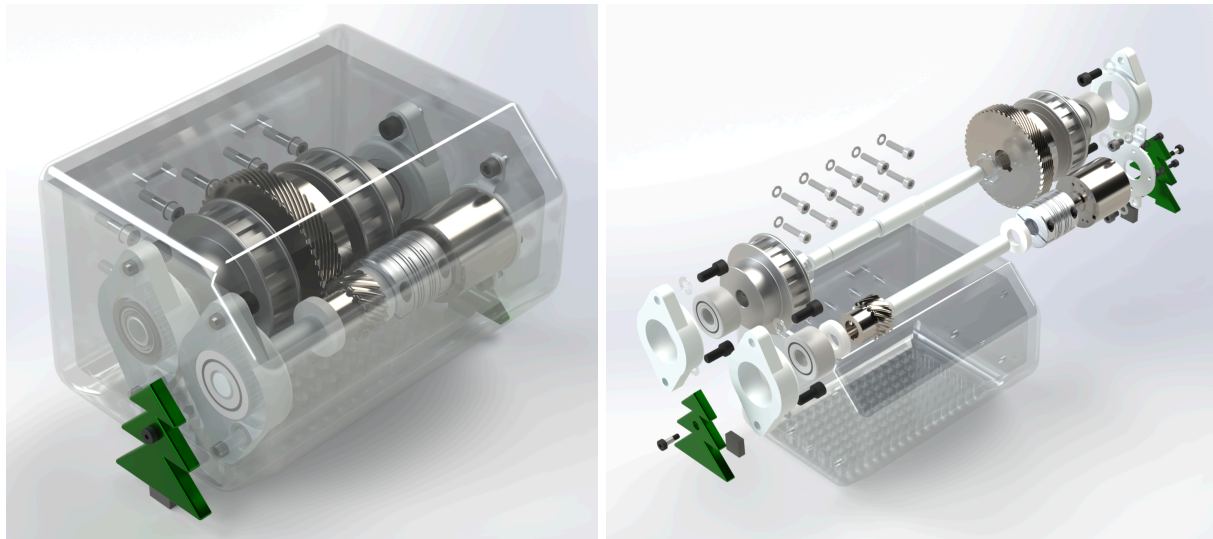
The motor housing subassembly render (Solidworks Visualize)
